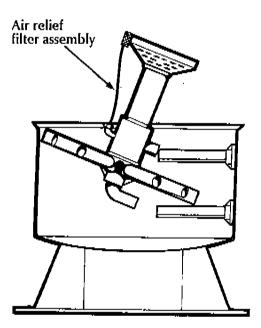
B - Long laterals opposite inlet/outlet pipes will prevent installation of internal assembly.
